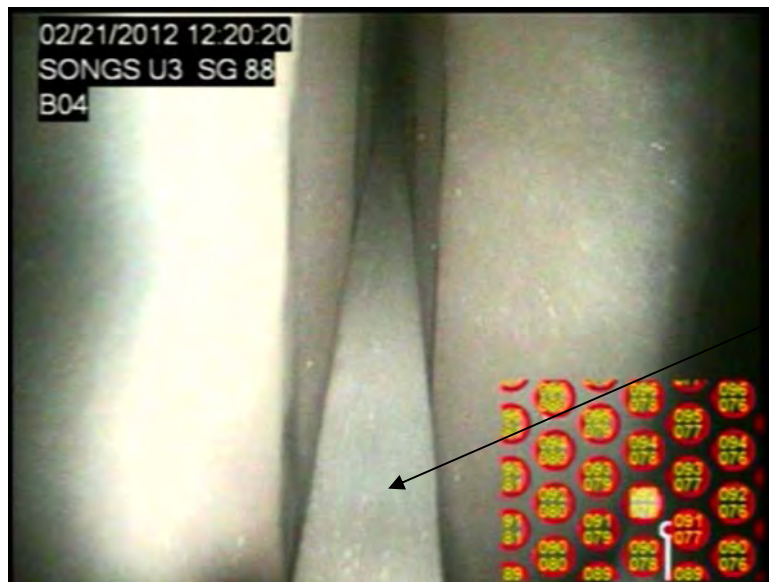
Tube Bundle Visual Inspection Image [Unit-3B]
